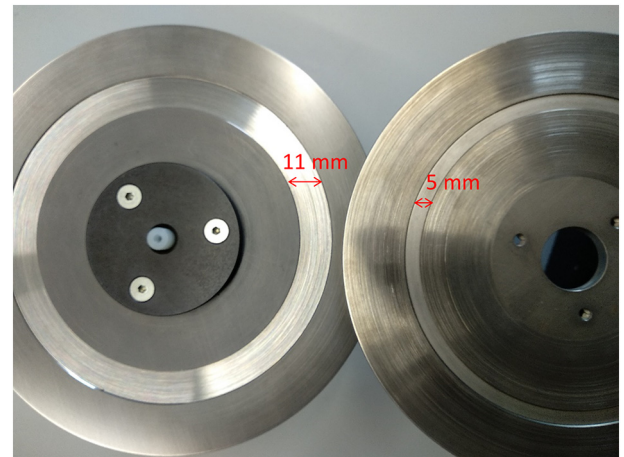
Top view of powder feeder rotating disks A and B showing different dimensions of annular grooves.
